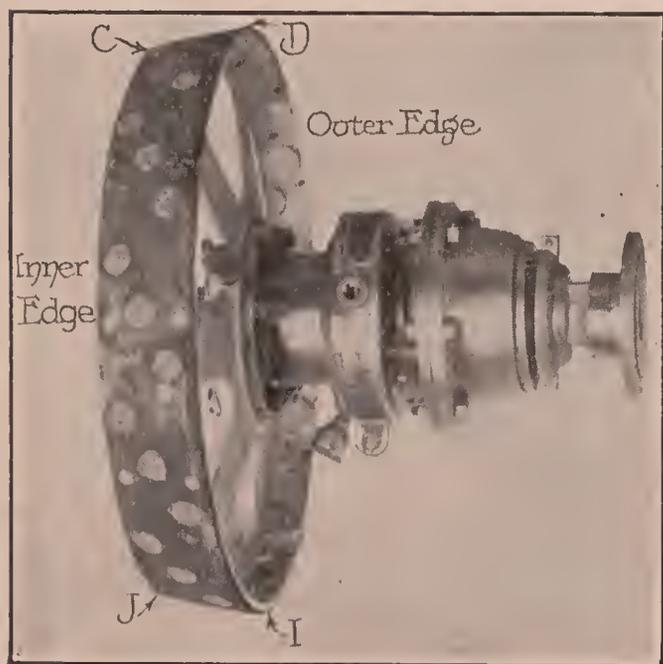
A typical cone clutch, with cork inserts, showing the dimensions needed for laying out a clutch lining.
